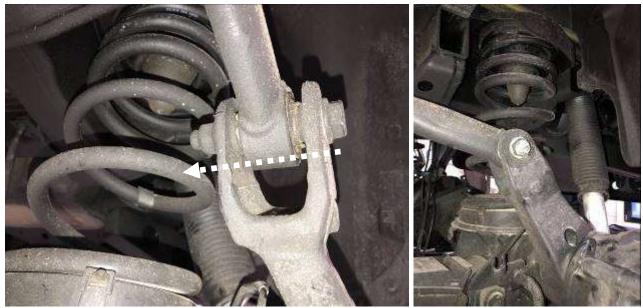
Assembly of trailing arm screw from wheel side inward to rear axle spring
